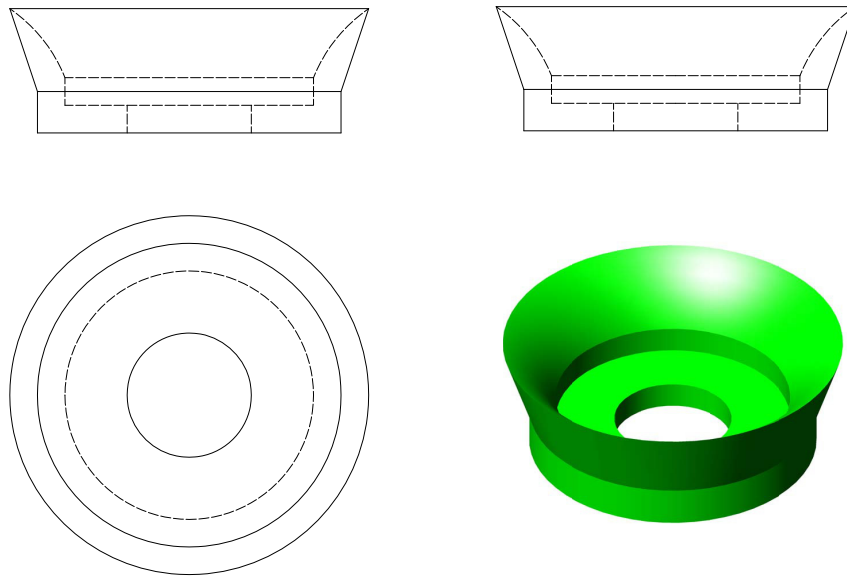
Drawing of the die jacket part (Version 2).
